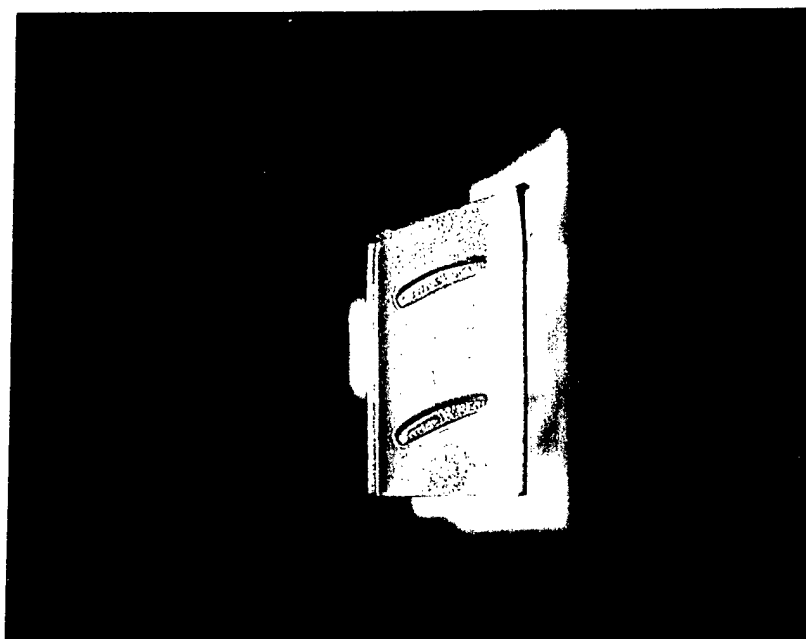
Inside Edge of Inner Shroud Showing Brazed Vanes (Magnified 1.5×).
